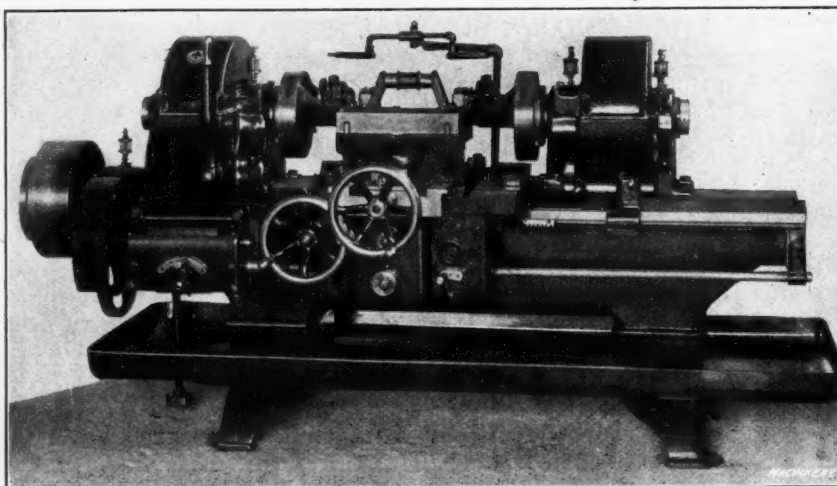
Type B or Manufacturing Lathe for machining One Kind of Crankshaft
